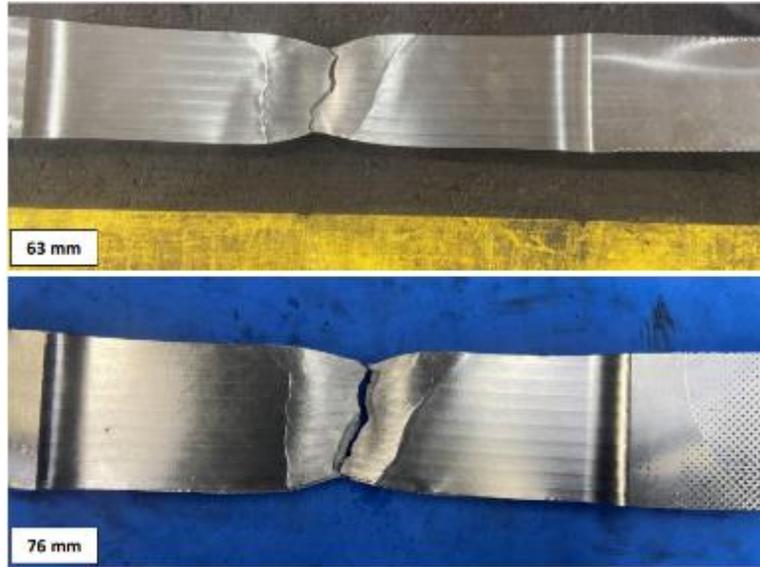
Tensile test pieces from welded joint fractured on weld metal.
